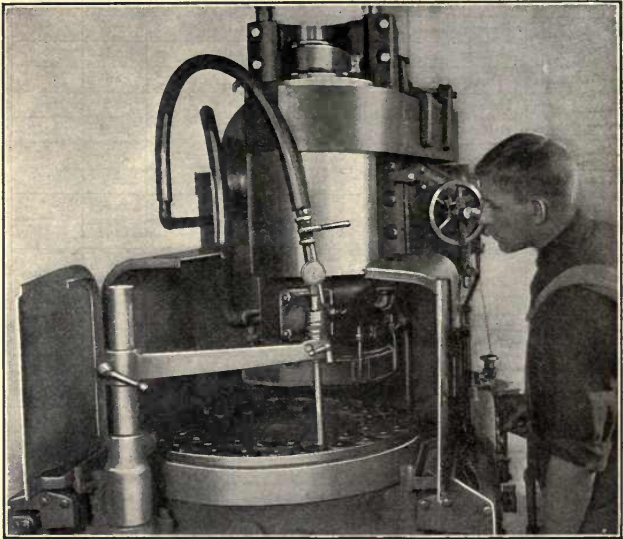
Continuous reading caliper gauge for use on Blanchard high-power vertical surface grinder.
